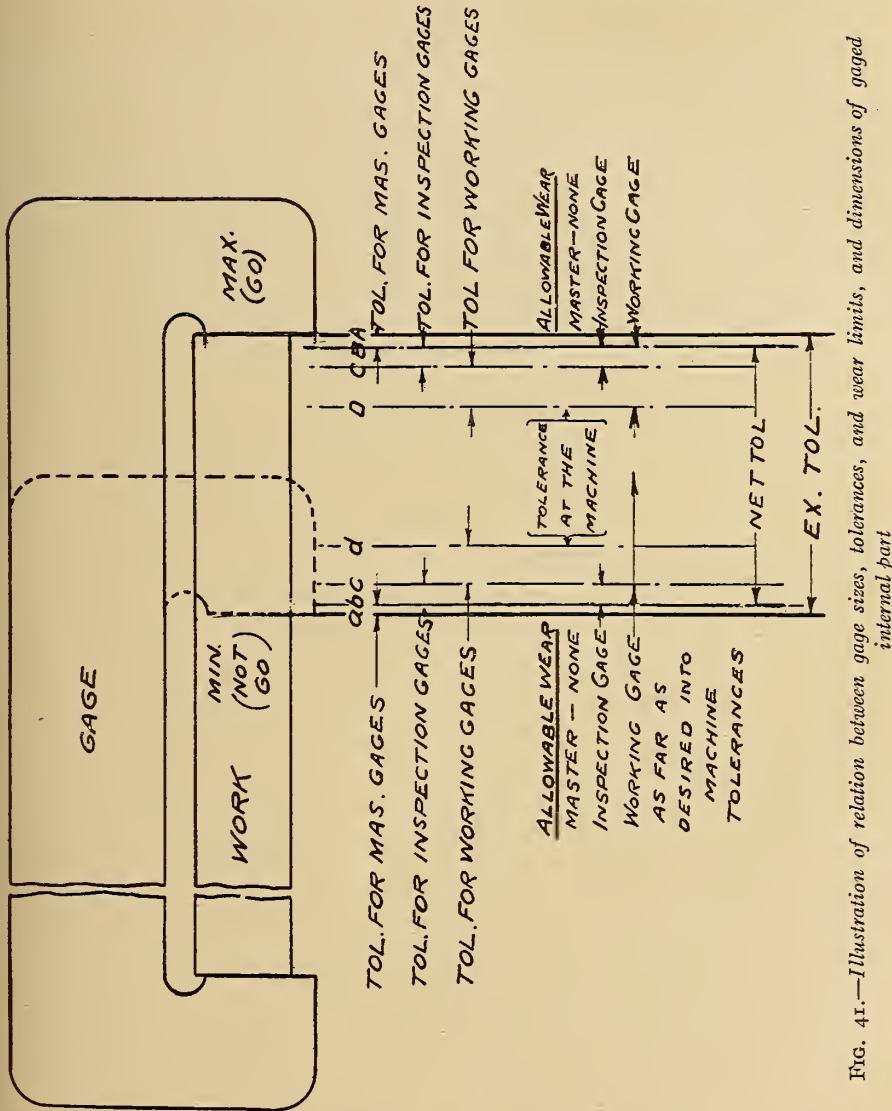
Illustration of relation between gage sizes, tolerances, and wear limits, and dimensions of gaged internal part
